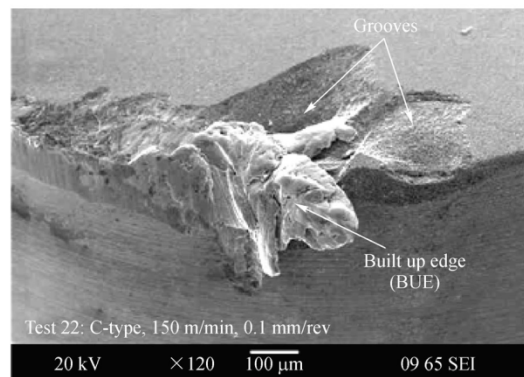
BUE generation in worn out insert in high speed cutting of Inconel 718 with coated insert [21]
